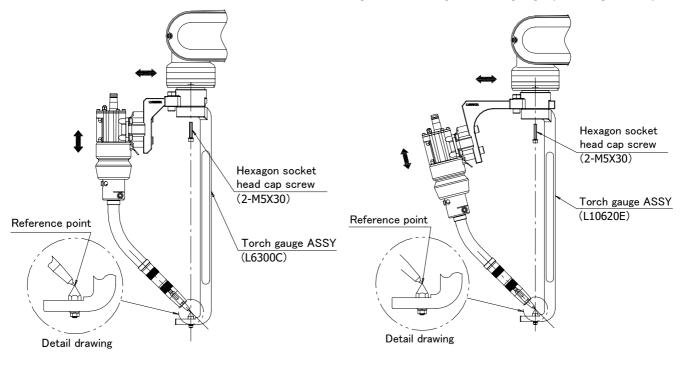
Mounting the torch gauge (for 45° curved torch)
